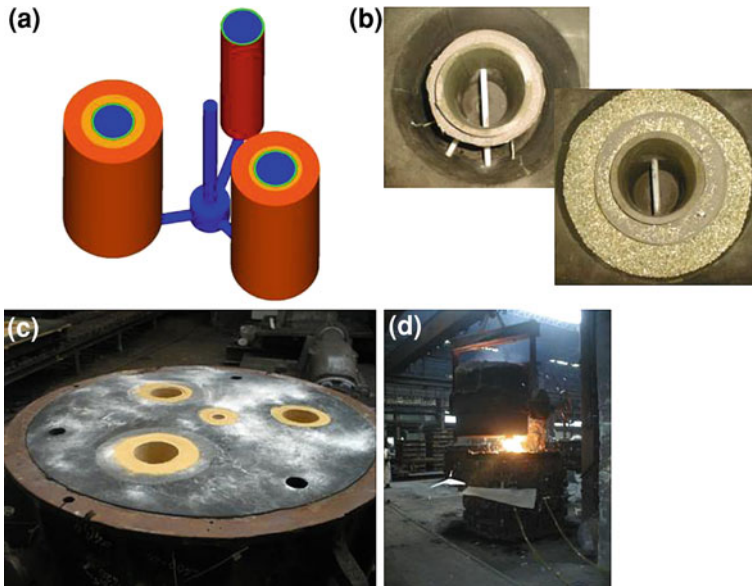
The course of the experimental tests—powders: a principle of forming the mould and its cavity tooling, b view of division surface of a complete mould, c a CAD drawing (I-deas), d view of assembled mould, mould pouring with cast steel (with the connections)
